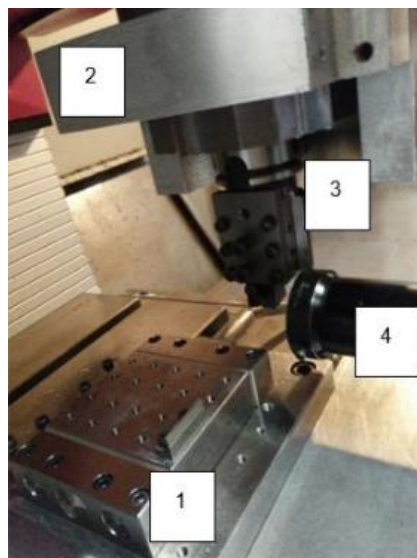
Setup for ex-situ cutting. (1) Kistler dynamometer, (2) holder, (3) tool, (4) high-speed camera.
